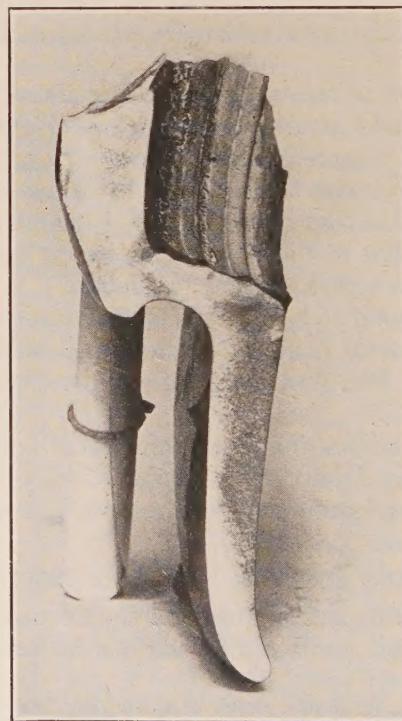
A—SHOWING PIECE OF THE TOP SHELL
